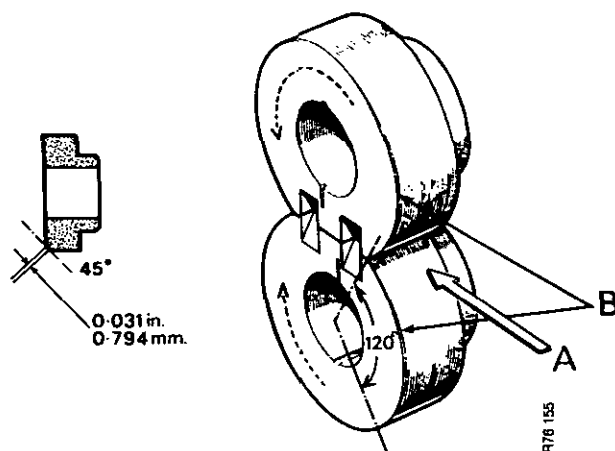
CHAMFERING THE INNER ROTOR BUSHES
